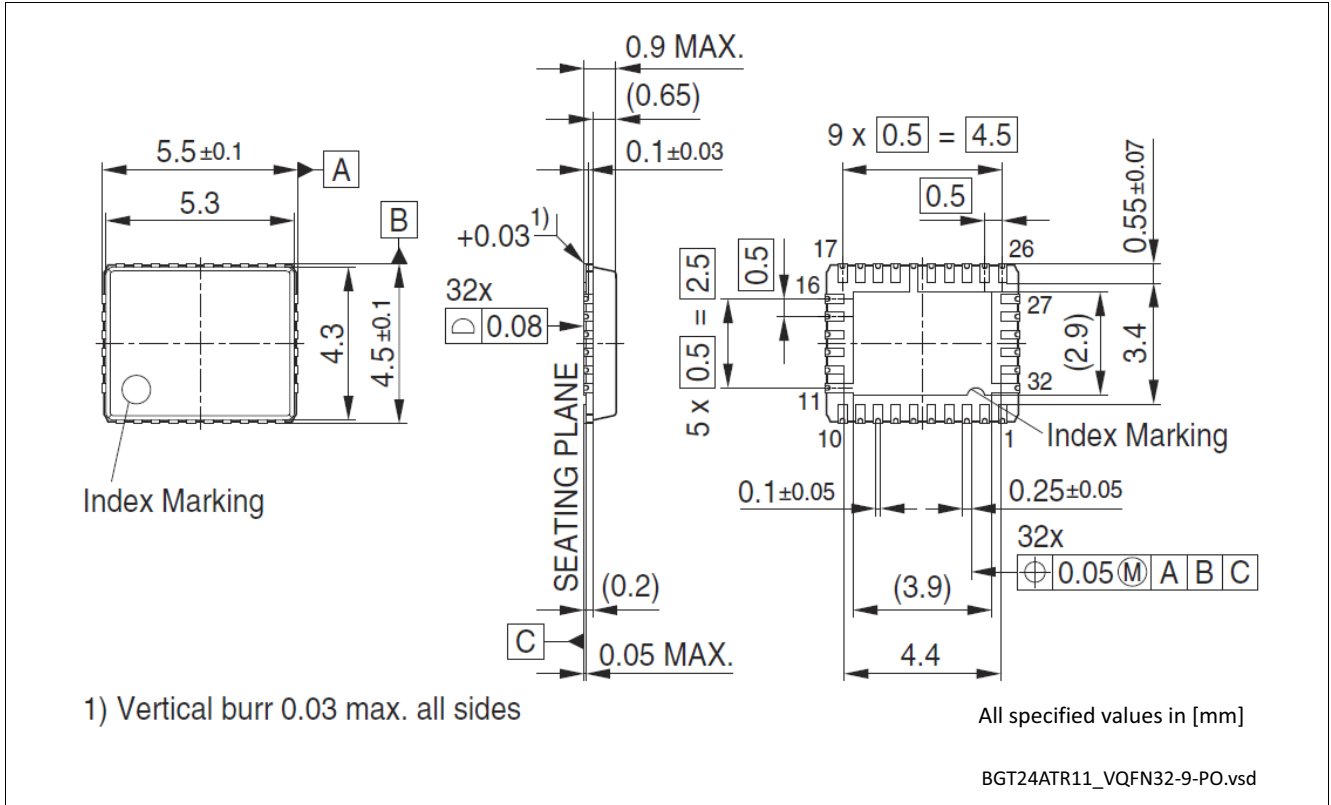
Package Outline (Top, Side and Bottom View) of VQFN32-9
